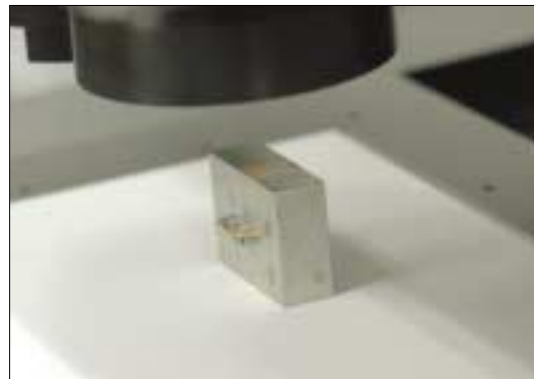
Noncontact profile measuring machine (Video-Check-L-400, Werth Messtechnik GmbH, Giessem, Germany) measuring gap distance. The integral segmented LED illumination and the 3D CCD camera allow an area of the measured component to be illuminated and viewed.
